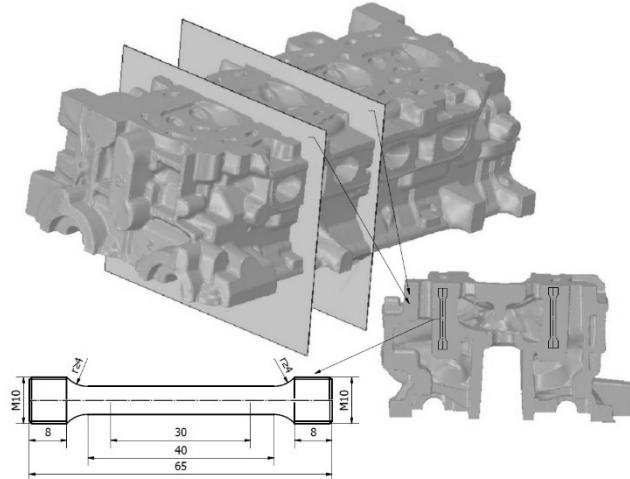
Locations where samples to the strength test were cut out from the cylinder head casting
